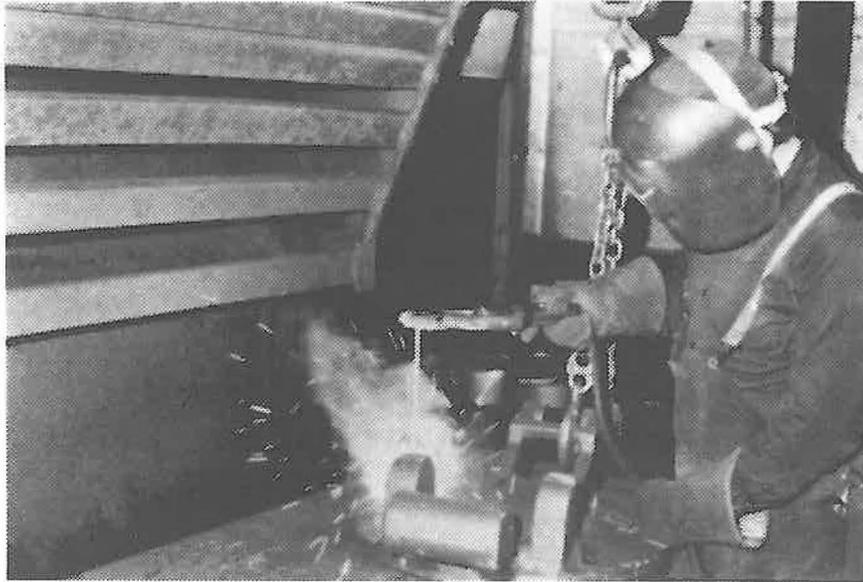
Fume control by side draft hood during welding on small castings in a booth.
